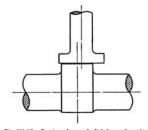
Center of camshaft lobe and center of valve lifter are offset to prevent eccentric wear of contact surfaces.
